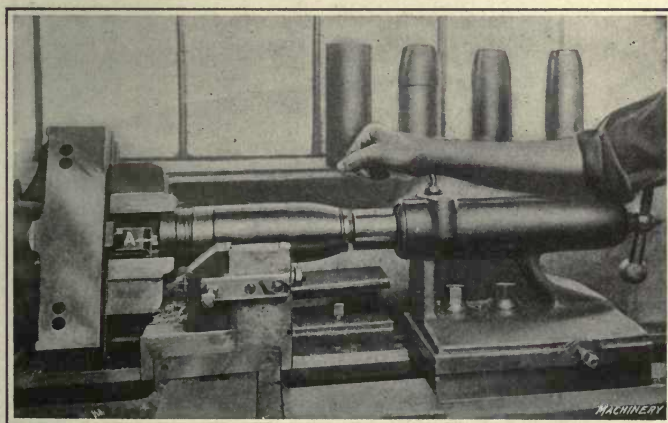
Finish-turning External Diameter on an Engine Lathe
